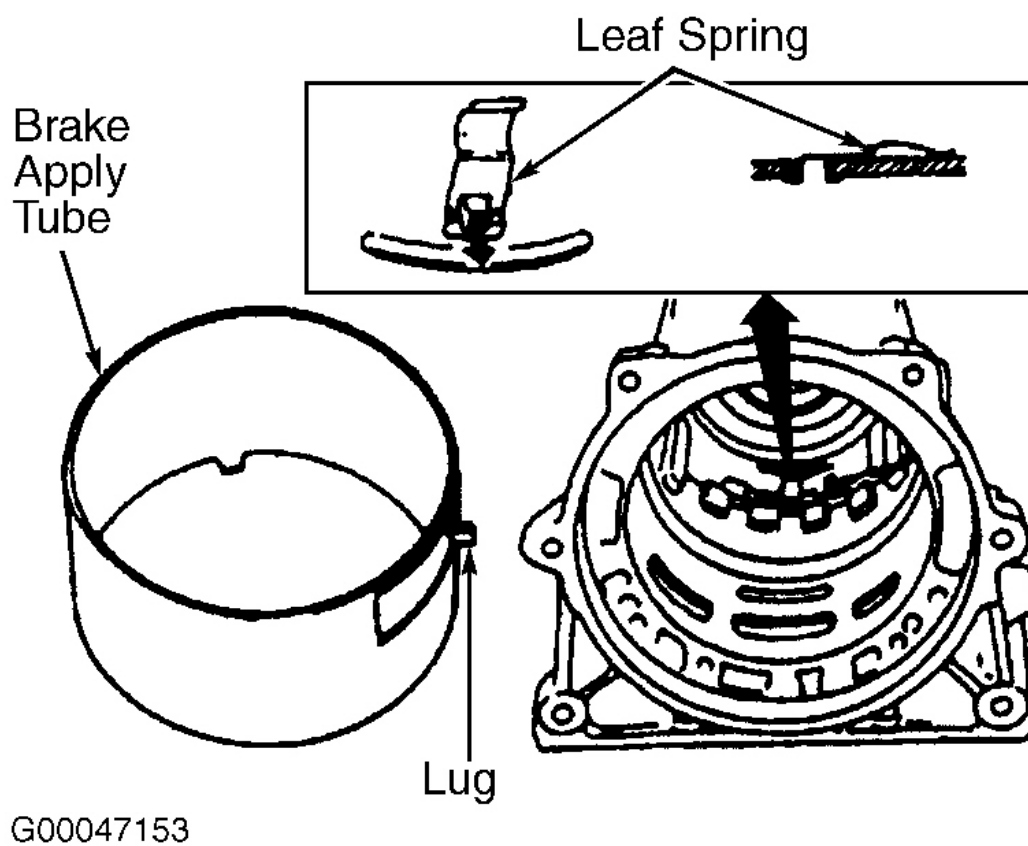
Installing Brake Apply Tube & Leaf Spring
